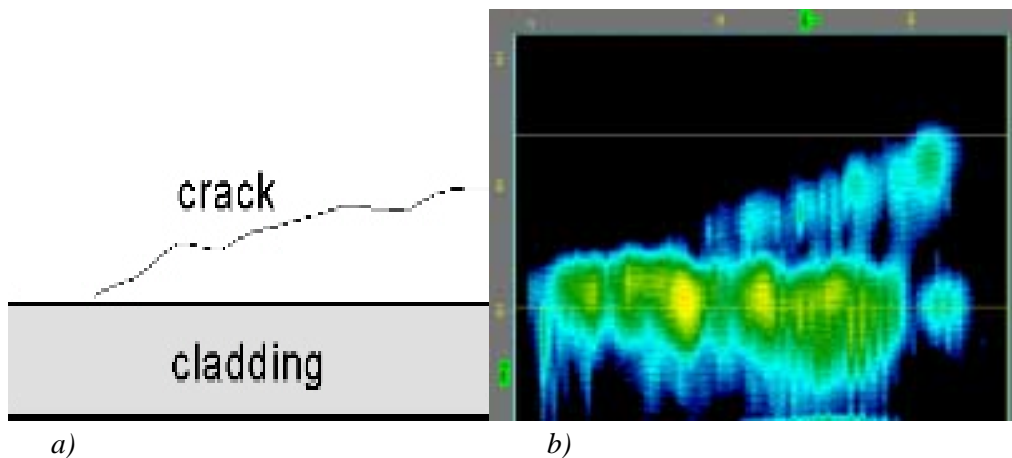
Crack tip front of a sub cladding defect in the test block PS 13 and corresponding measurement with 0°L probe (b).
